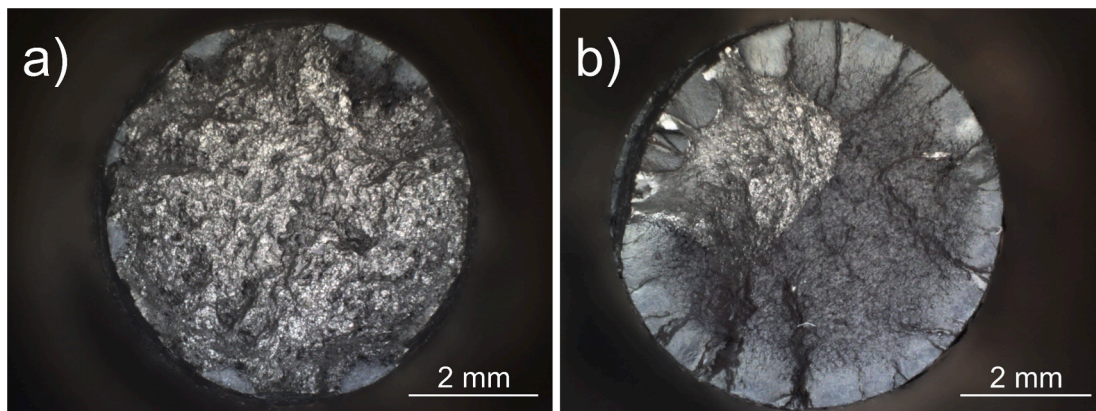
Fracture surfaces of test pieces for (a) SLC and (b) SLR experiment (optical bright-field microscopy).
